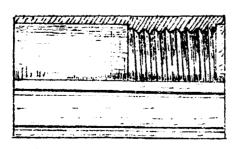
SxT (slip by thread) PVC Adaptor (cutaway view)
